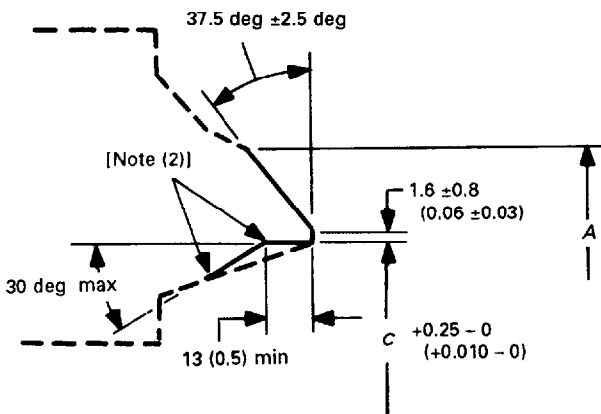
MAXIMUM ENVELOPE FOR WELDING END TRANSITIONS
